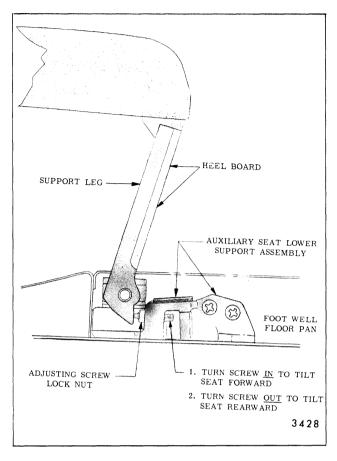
Auxiliary Seat Adjustment - Cadillac Limousine Styles
